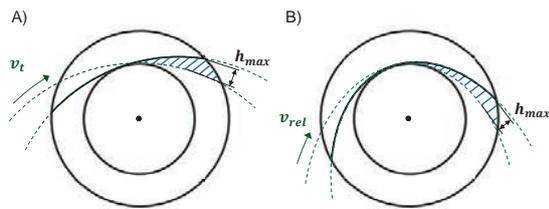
Relative tool motion encompassing the workpiece cylinder and the machined volume between two revolutions of the cutting tool for (A) conventional whirling and (B) synchronized whirling with a smaller cutting thickness for the tighter encompassment
